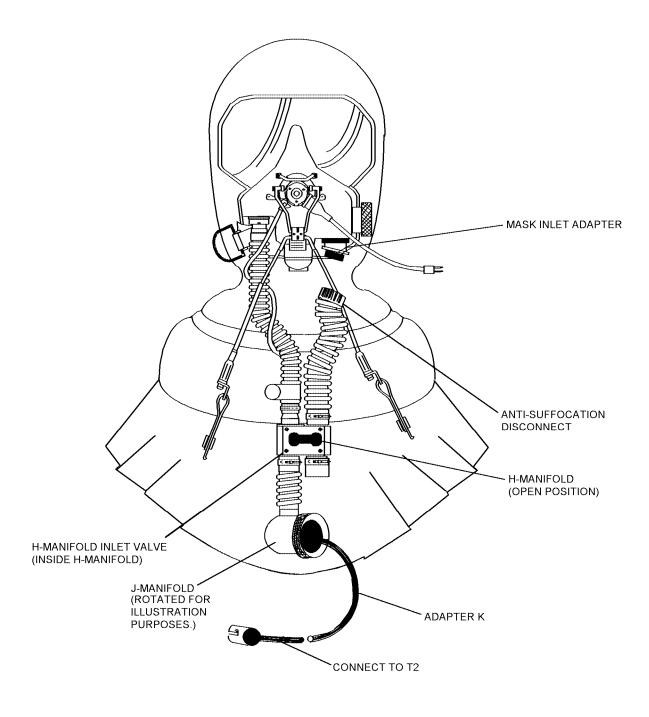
(V)1 Variant - Non-Oxygen H-Manifold Inlet Valve - Reverse Leakage Test
